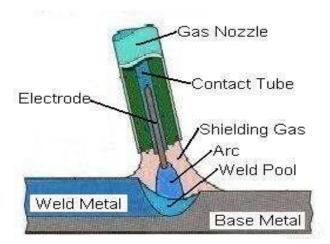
Basic Structure of Metal Inert Gas (MIG) Welding
